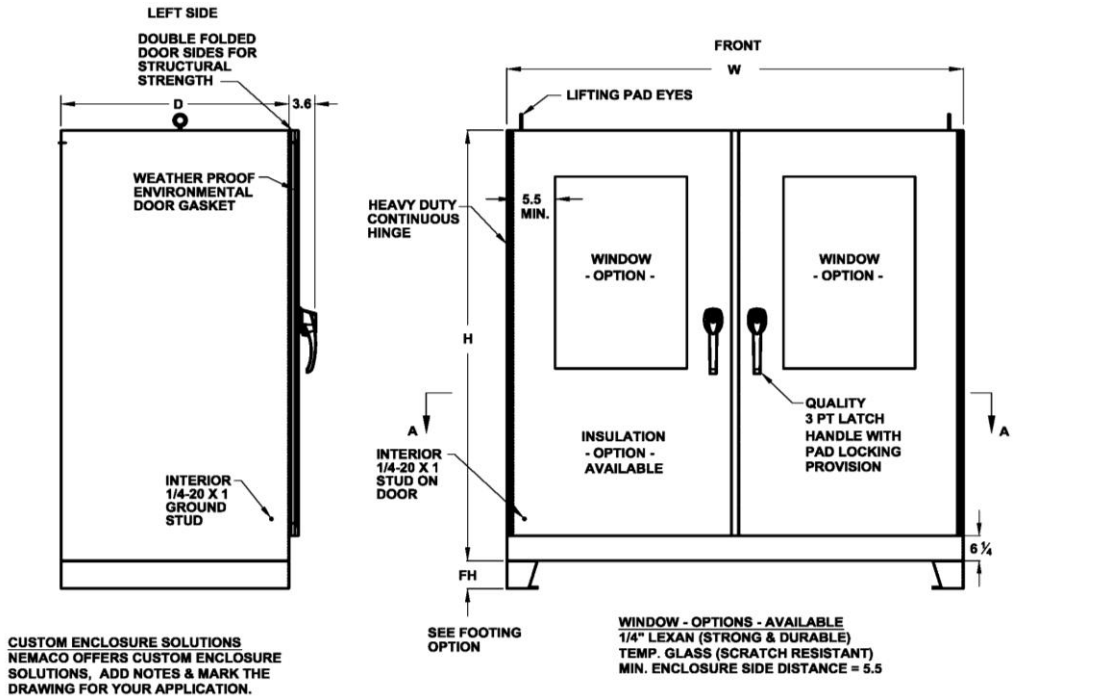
NEMA 4X - "PCE" STAINLESS STEEL ENCLOSURE - EXTERIOR DIMENSIONS
